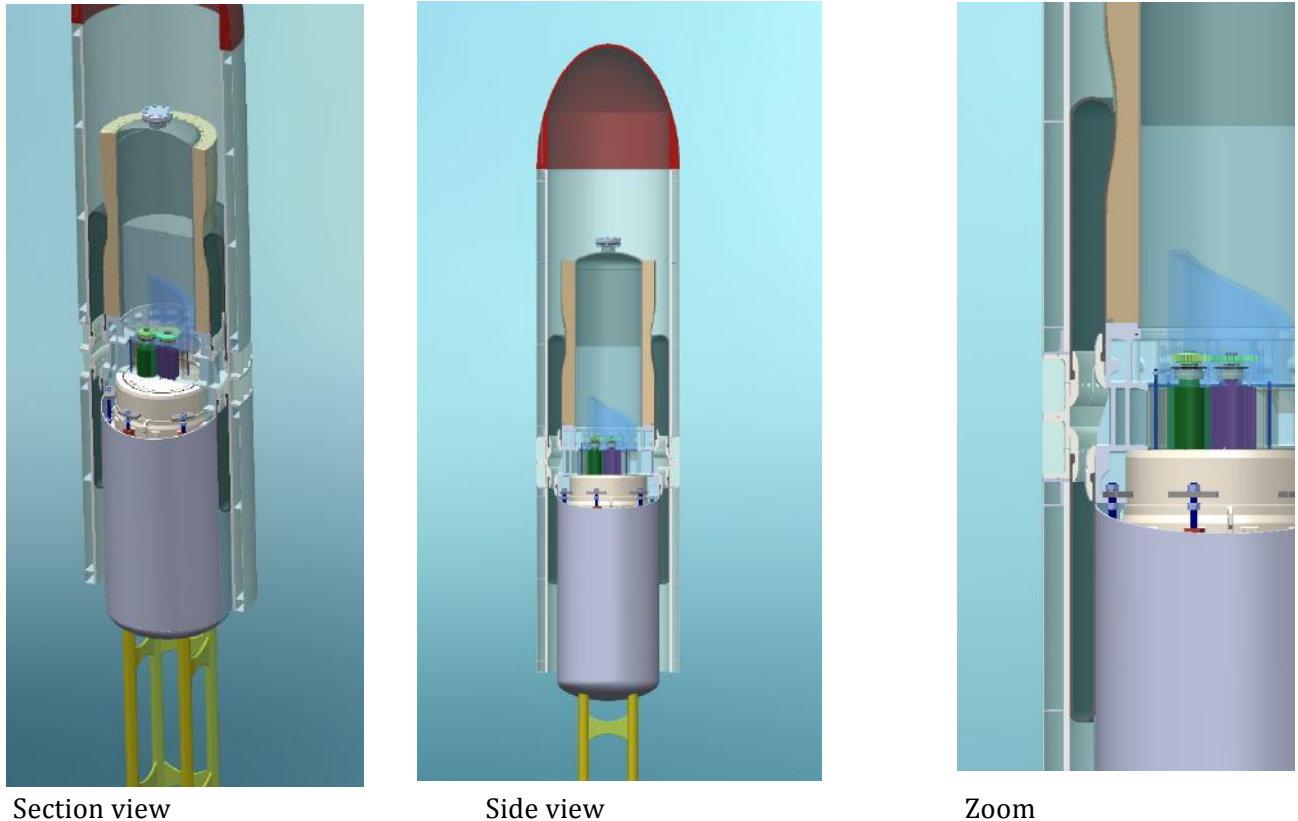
SECTION VIEW OF THE MEMBRANE
